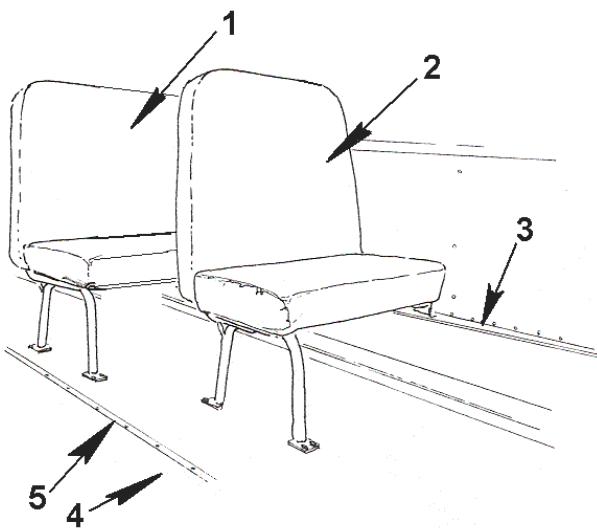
30" and 45" Passenger Seats and Chair Rail Mounting
